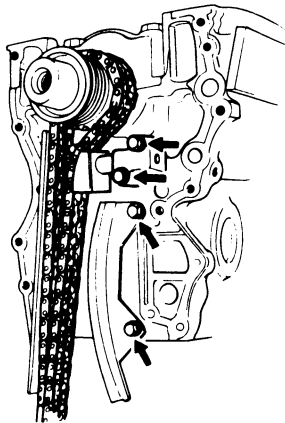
Removing Chain Tensioner and Timing Chain
